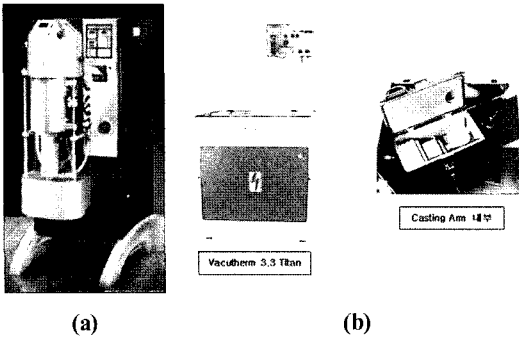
Vacuum pressure Casting machine(a) and Spinning Casting machine(b)
